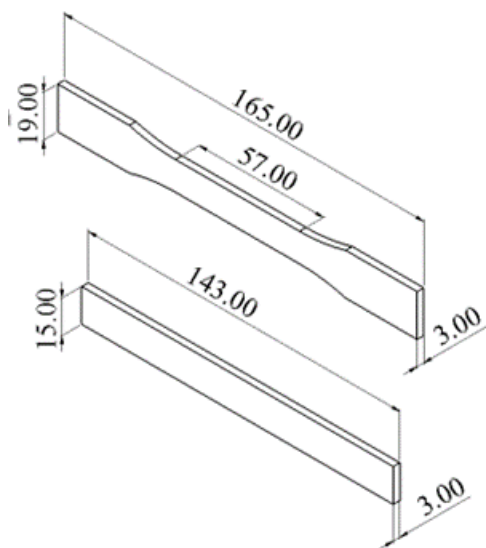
Scheme of the specimens (dimensions in millimetres)
